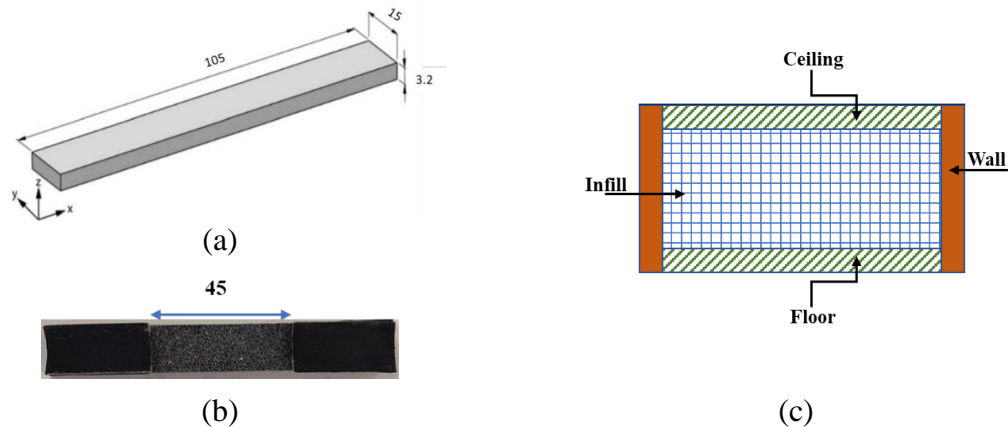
Uniaxial tension specimen: a) specimen dimensions b) gauge length c) cross-section of specimen normal to y-z plane
